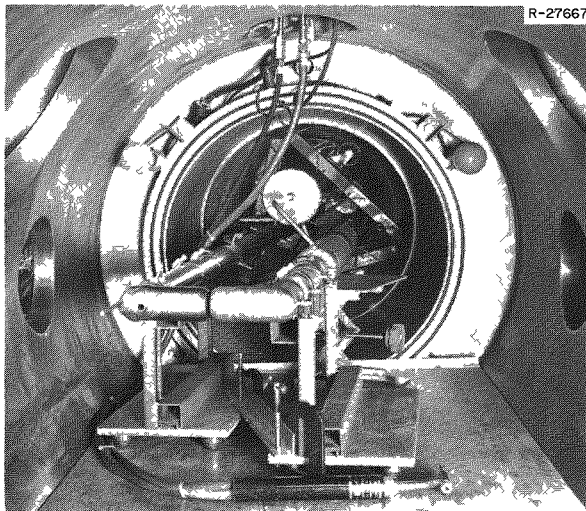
View of D-43 Loop FCL-8 in Welding Chamber in Position for Final Butt Weld.
